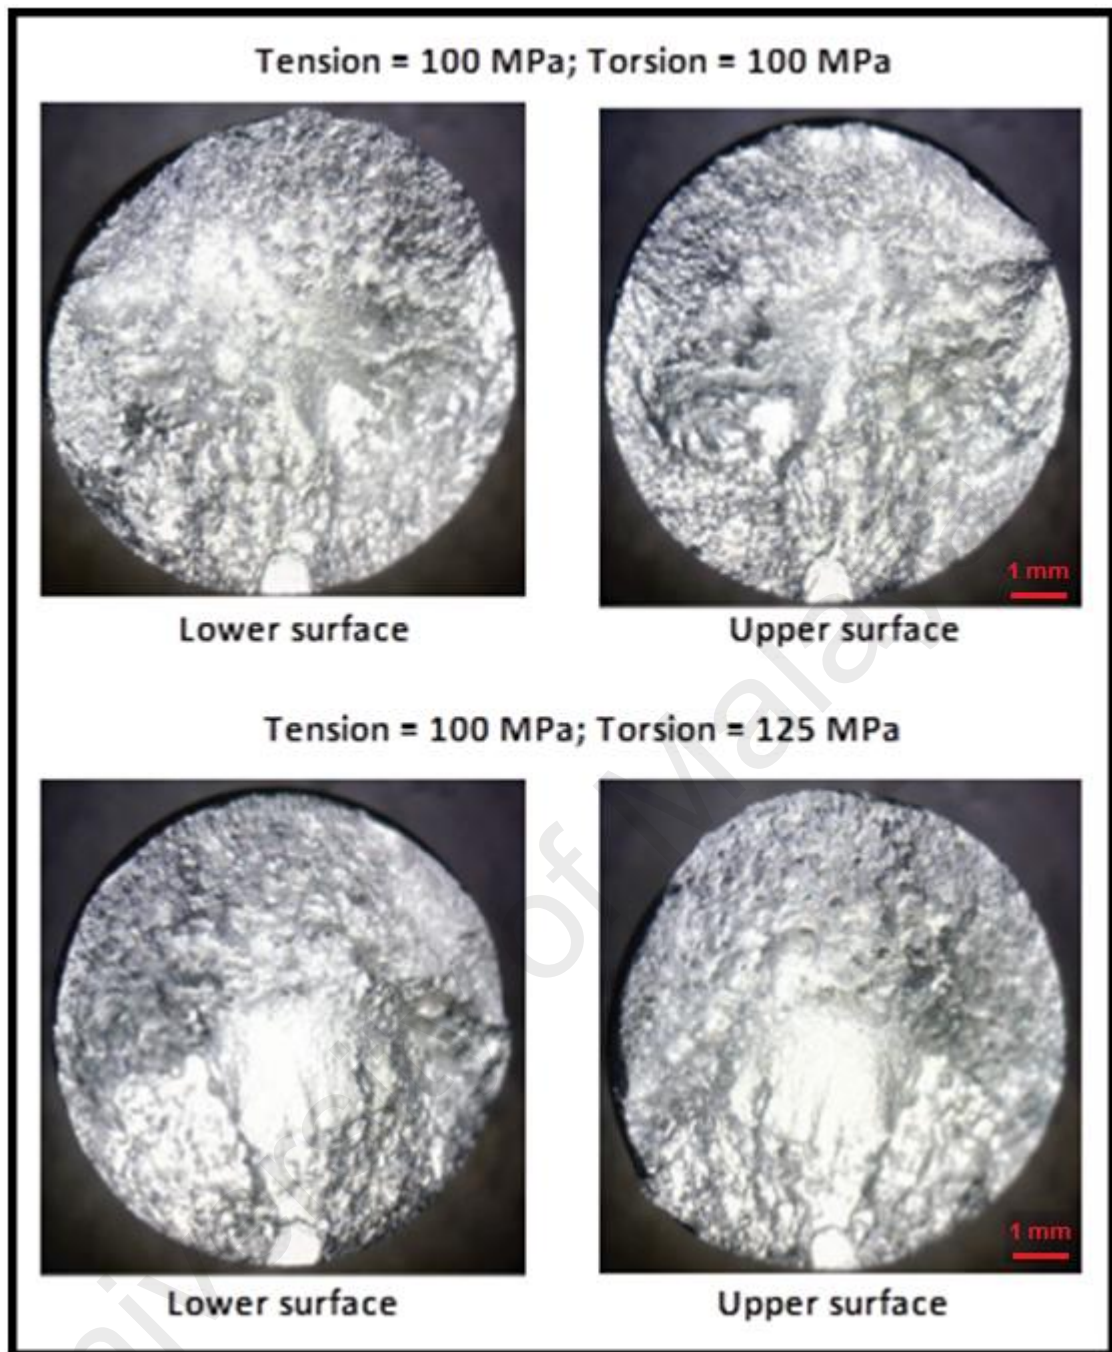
Fracture surface conditions of surface cracks ($a/c = 2$) on solid cylinder under combined tension-torsion loading.
